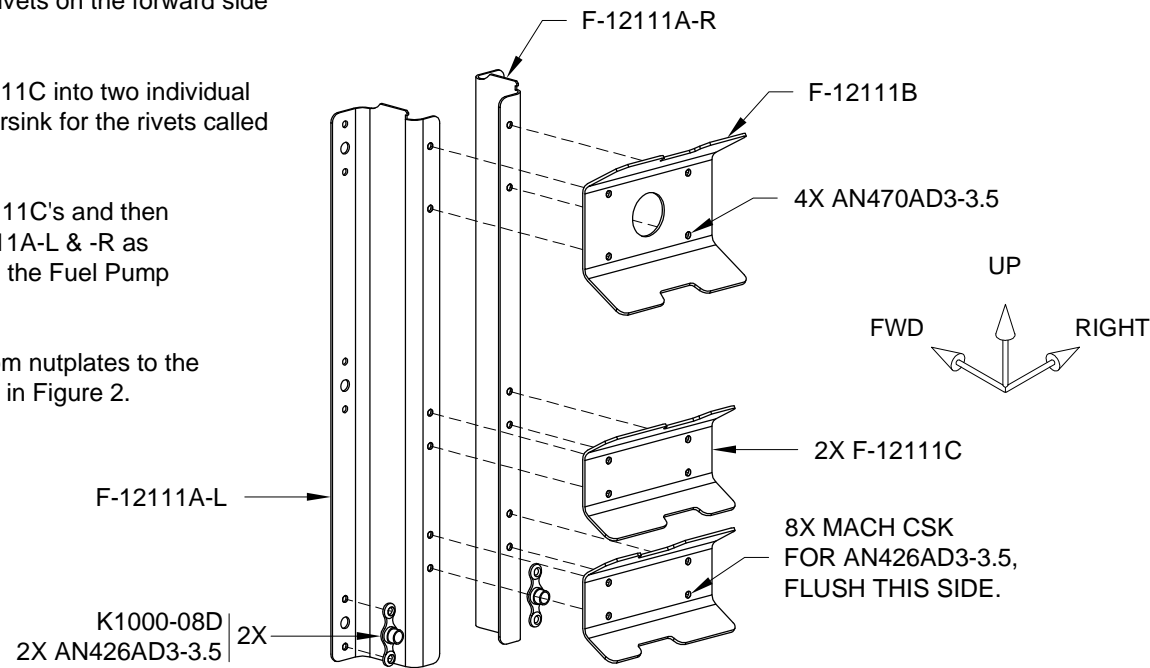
FUEL PUMP BRACKET ASSEMBLY
